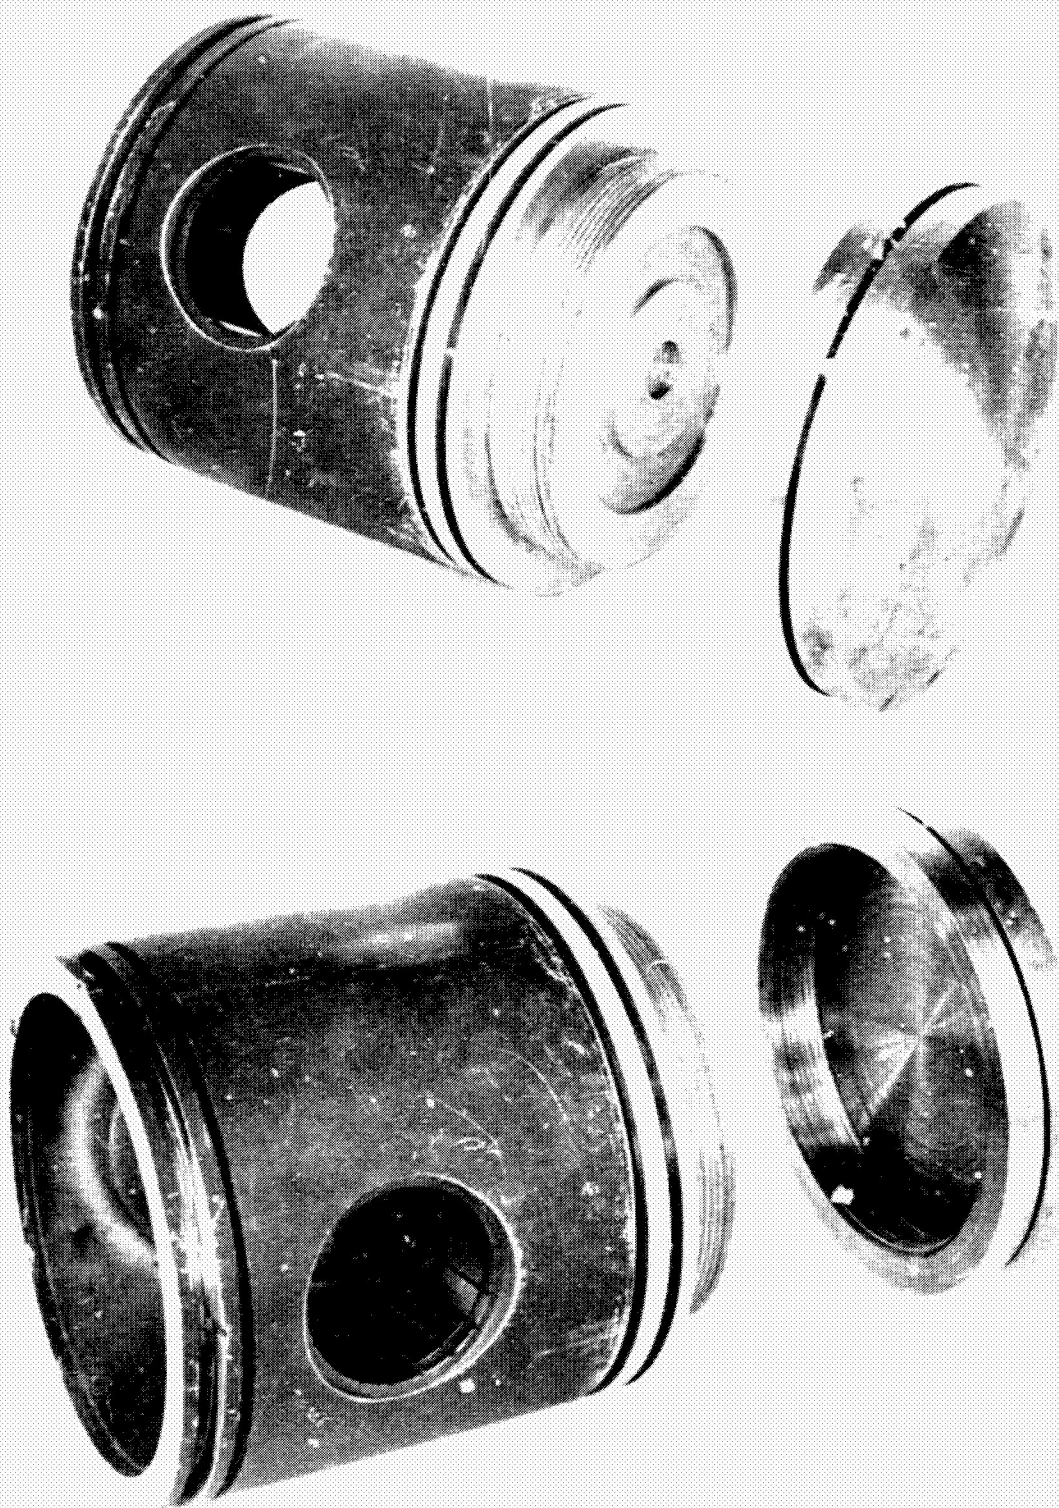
Aluminum Piston and Screwed on Steel Cap
